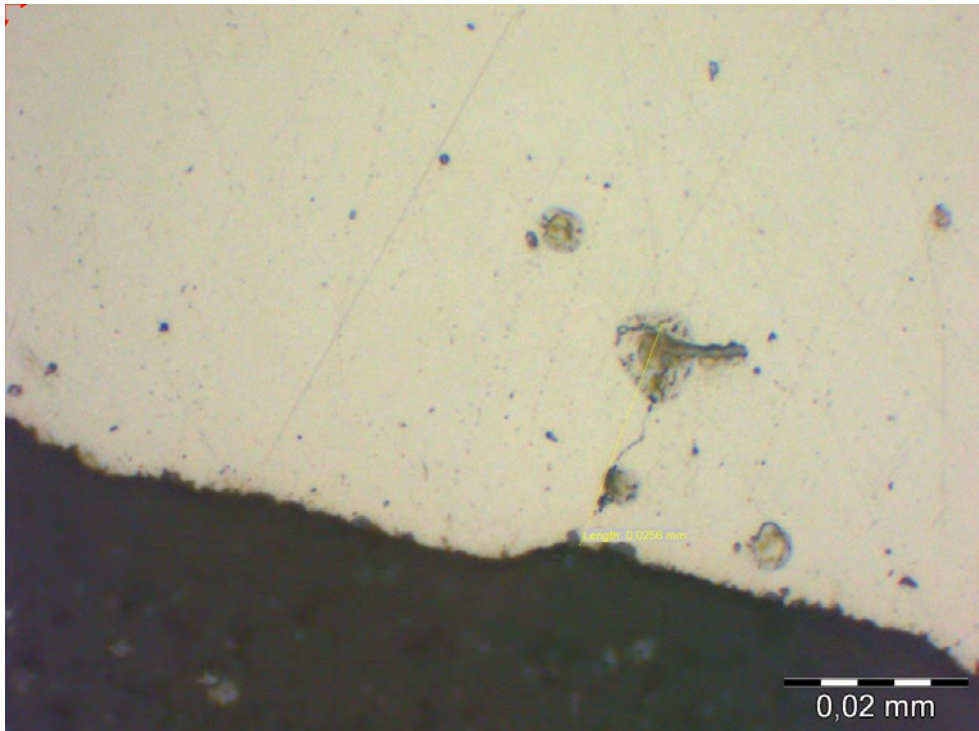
Crack at segment A, third ridge on barrel no. 1393
